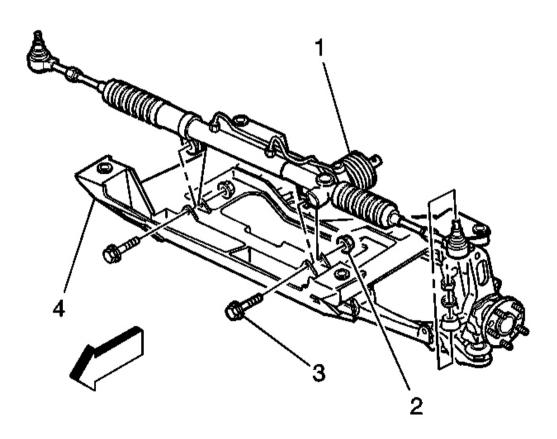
Brake Lines, Power Steering Gear, Mounting Bolts & Nuts Courtesy of GENERAL MOTORS CORP.
